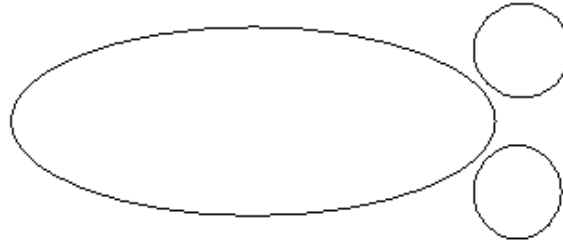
Plan View - Size and Arrangement of Laser beam Spots (Round) Relative to the Arc Weld Pool (Ellipse) Resulting in Minimum Weld Toe Wetting and Spreading
